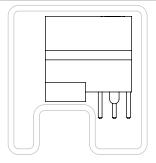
TR: PACKAGING VIEW TAPE AND REEL
